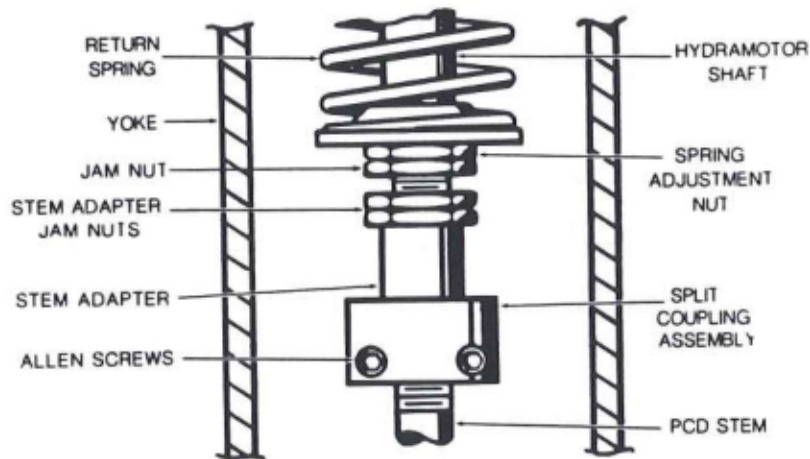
Shaft Connection for Pull Type Hydramotors
